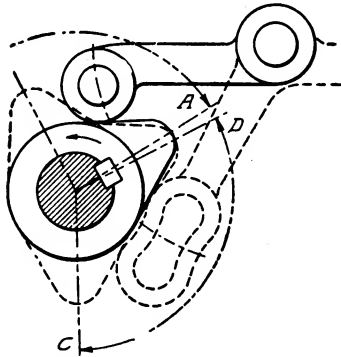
Cam Mechanism of Peugeot Single-Cylinder Engine
